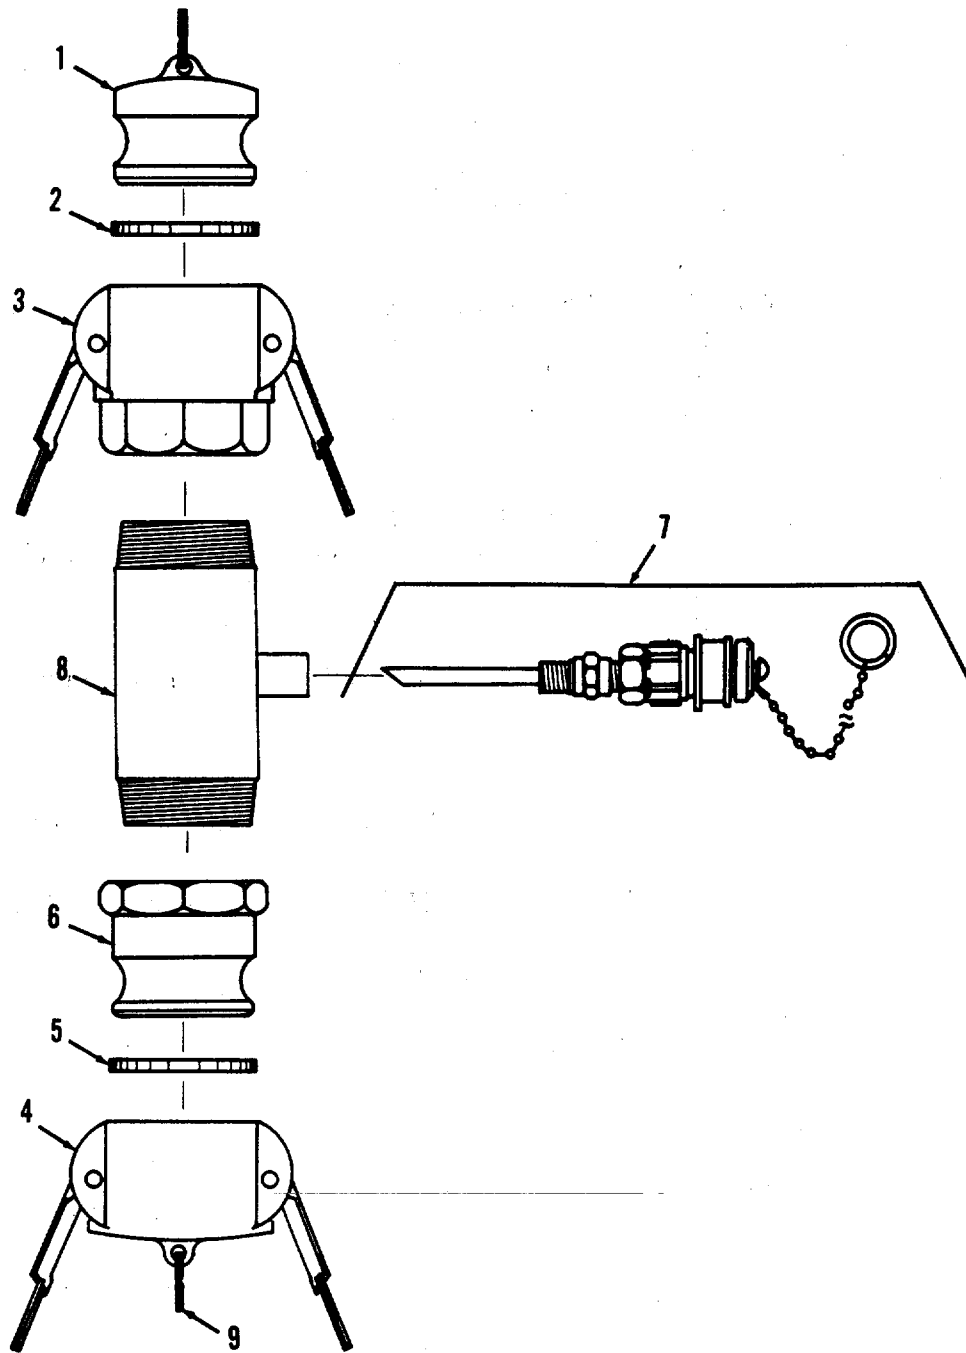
Adapter, Water Detector and Probe Assembly.
